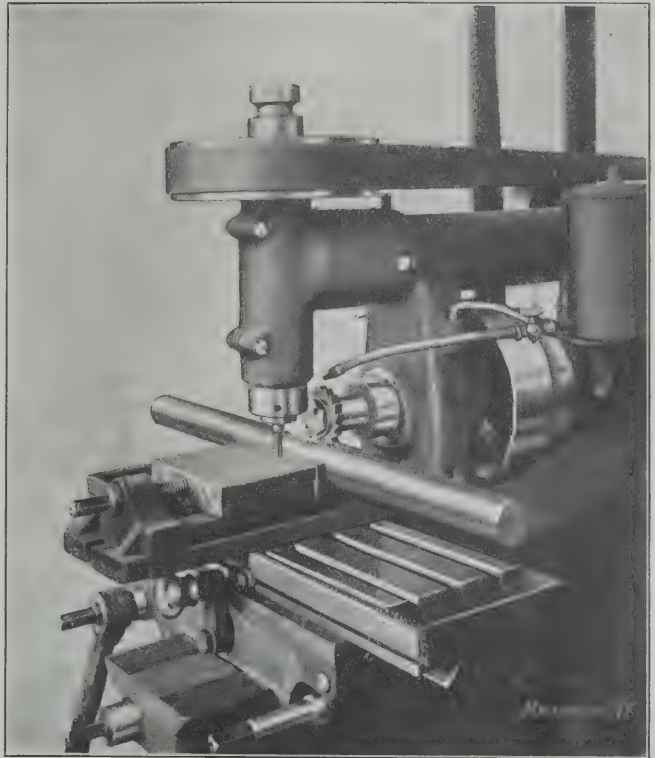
First Operation in milling a Feather Keyseat on the Chicago Duplex Milling Machine
